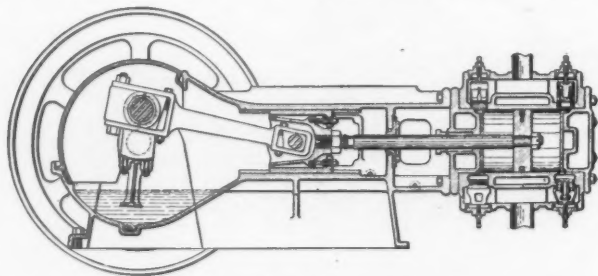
SECTION OF 10 BY 10 ENCLOSED FRAME POWER DRIVEN AIR COMPRESSOR.
